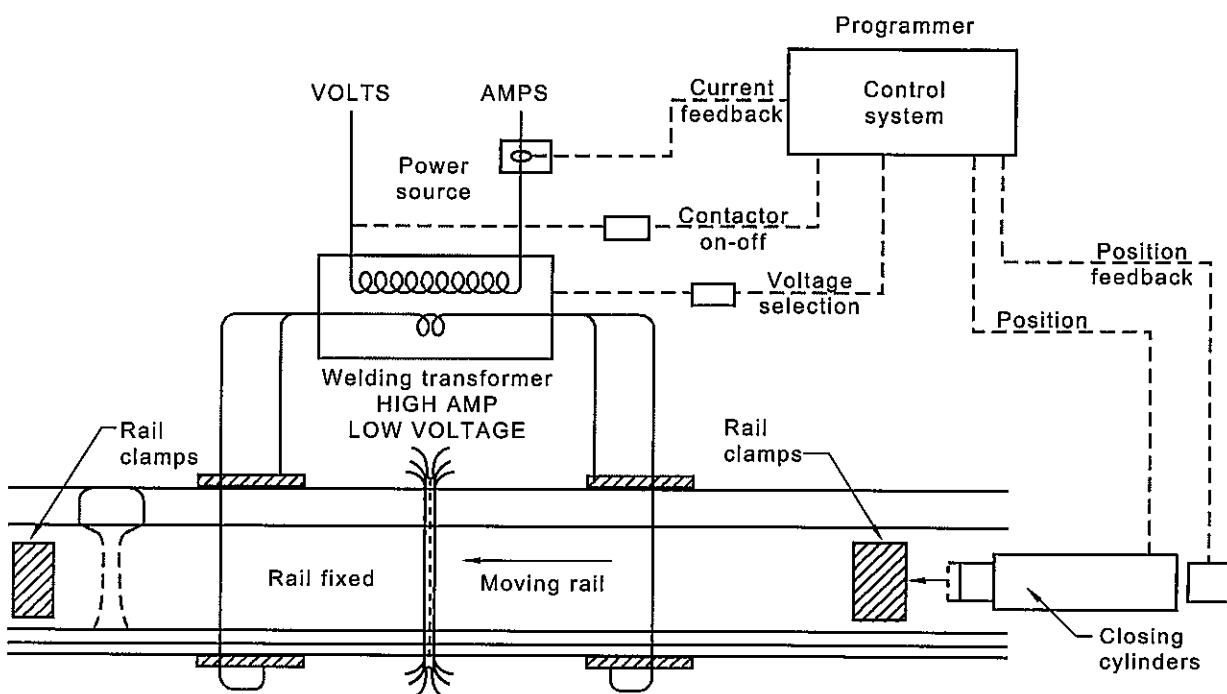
TYPICAL FLASH BUTT WELDING SET-UP
